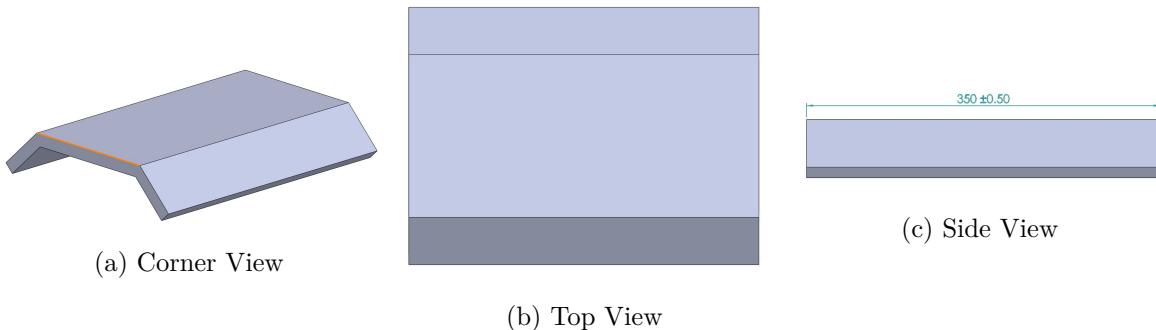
Rough Solidworks Drawing of the Base Plate
